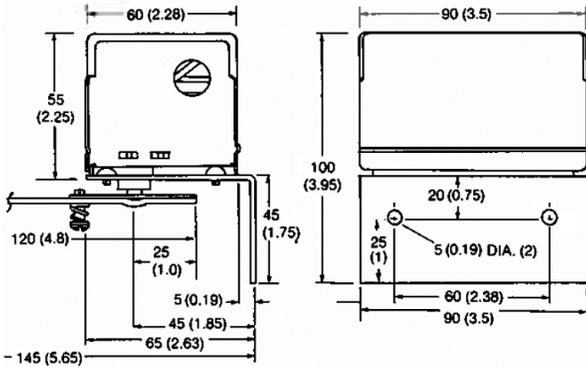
Short Bracket Model with arm linkage attached. Dimensions in mm (inches) are nominal.
